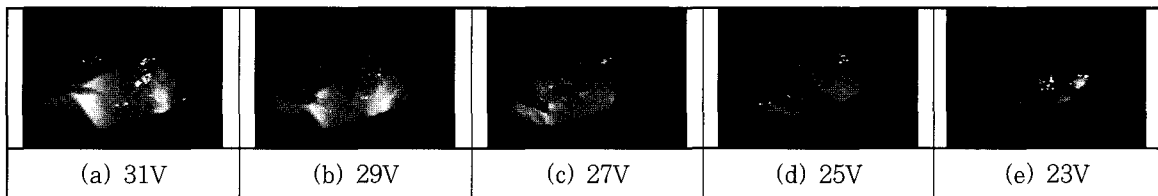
Effect of welding voltage on the welding pool depression (Welding current: 440A, Gap size: 1.5mm)
